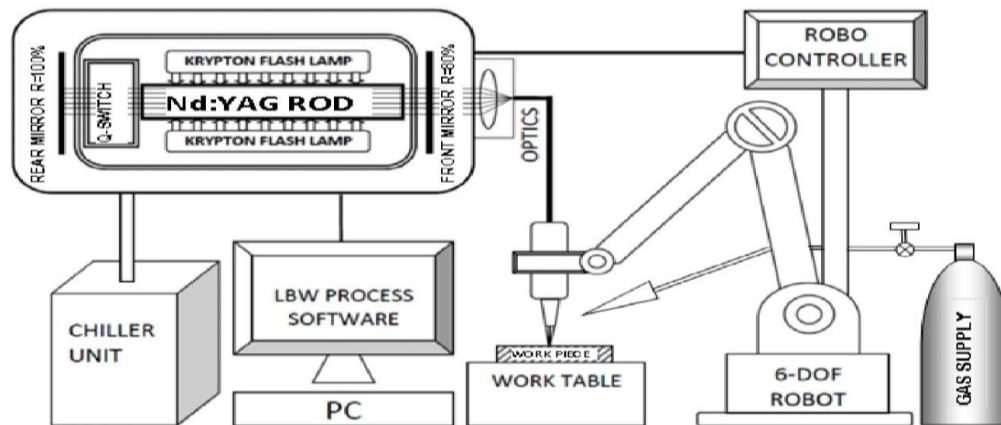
Nd: YAG Robotic LASER Welding Set-Up.
